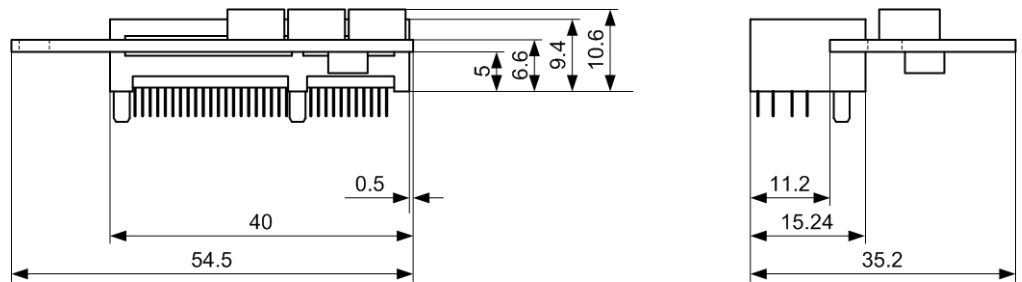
Dimensional Drawing (with horizontal connector Meritec 983172-064-2MMF) [mm]
